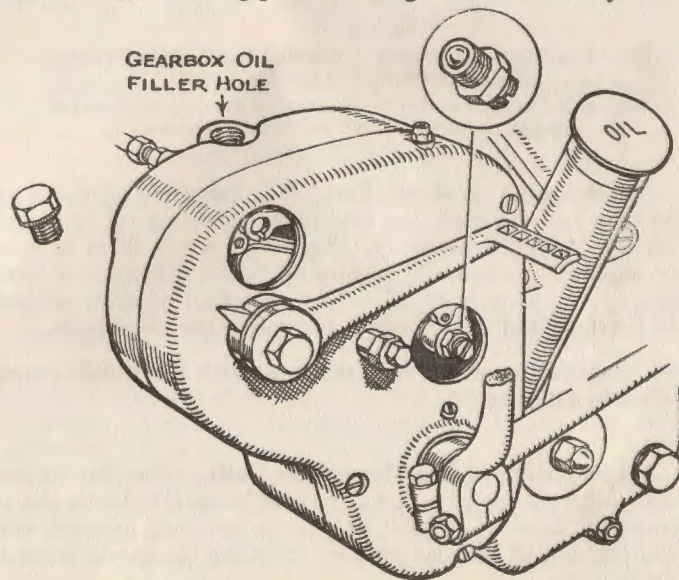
Clutch lever and cable adjustments (“Super Meteor”).
